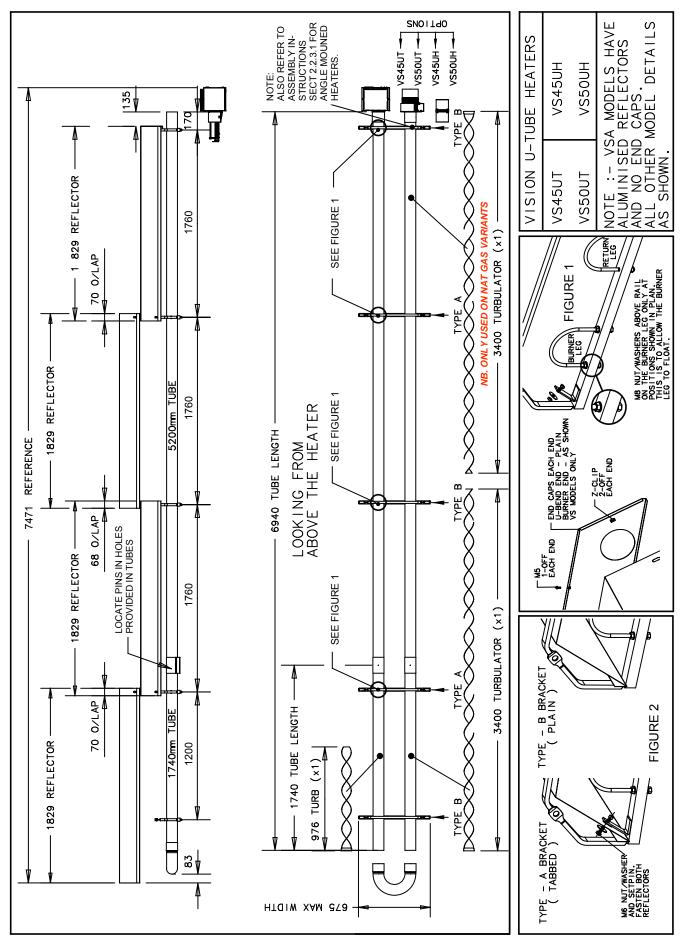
Vision Heater Assembly: Models VS/VSA U tube 45/50kW.
